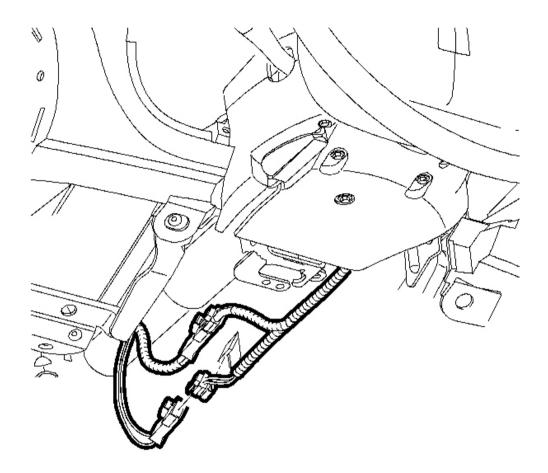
Column Electrical Connectors Courtesy of GENERAL MOTORS CORP.
